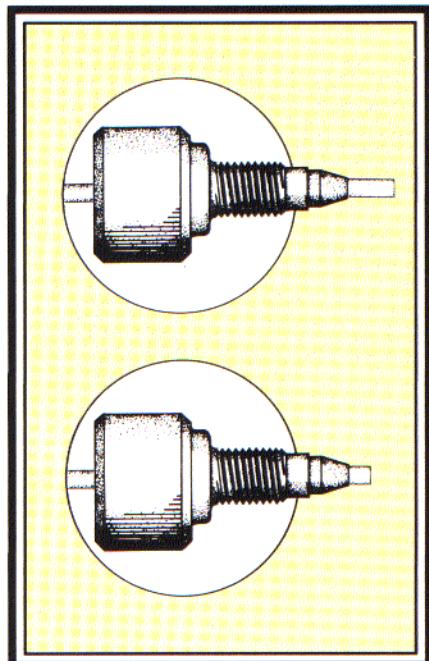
Adjustability of finger-tightened fittings. Polymeric ferrule grips the tube end to provide a leak-free seal, yet will slide freely on the tube end when disassembled so that the extension can be adjusted for fitting bodies of different depths.
